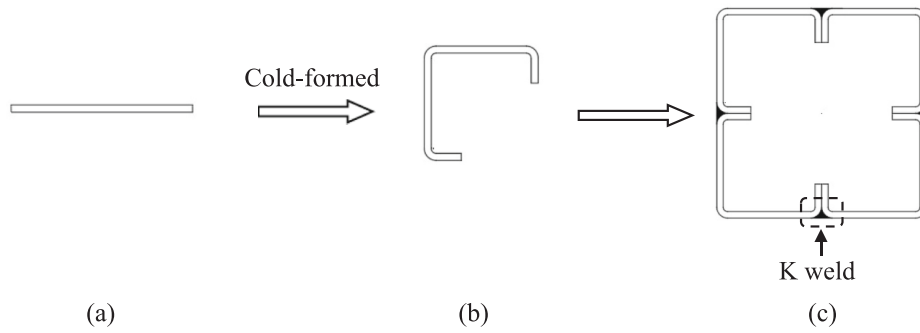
Process of making the outer steel tube from steel plate to final tubular section.
